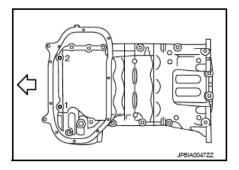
Upper Oil Pan Mounting Bolt Tightening Sequence Courtesy of NISSAN NORTH AMERICA, INC.
